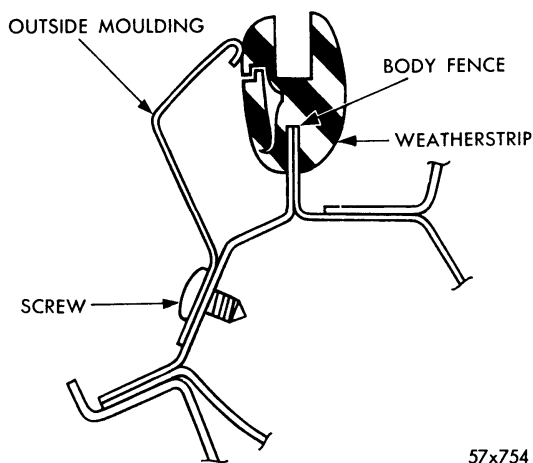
Windshield Weatherstrip and Moulding—Sides
